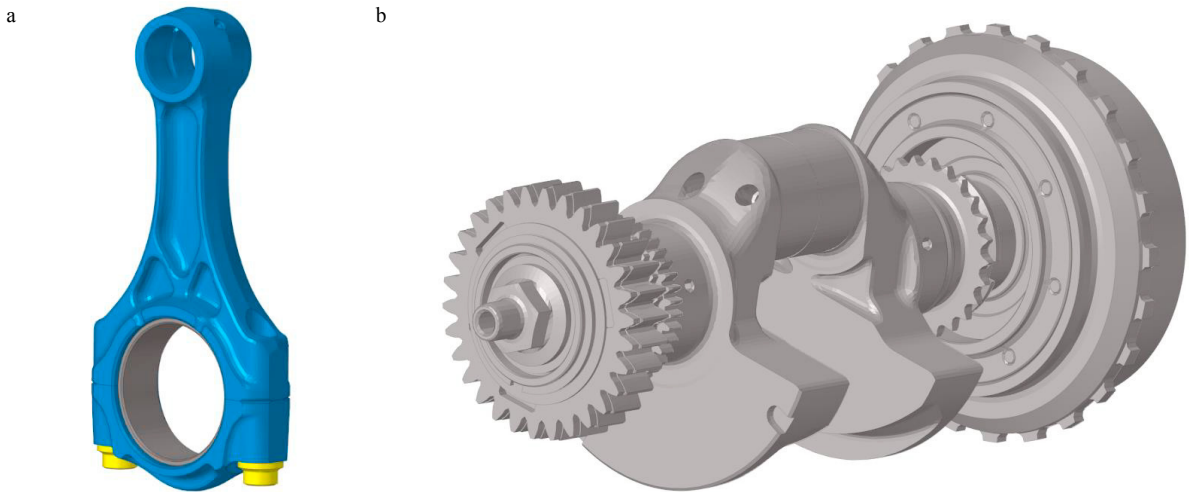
(a) steel conrod; (b) crankshaft adopted with the steel conrod.
